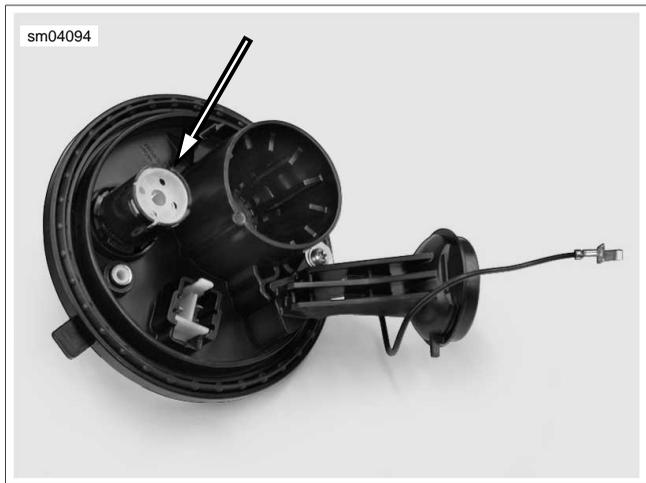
Fuel Tank Top Plate With Vapor Valve
